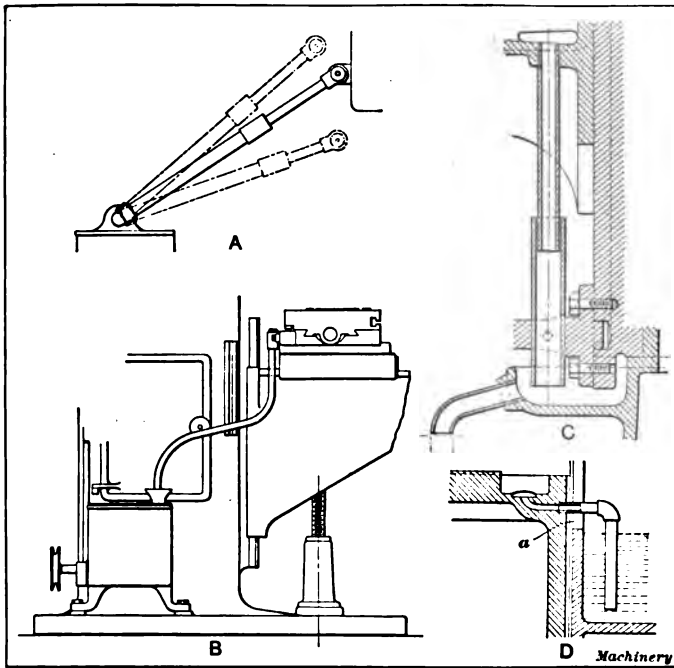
Drainage Connections to permit Vertical Adjustment of Work Table
